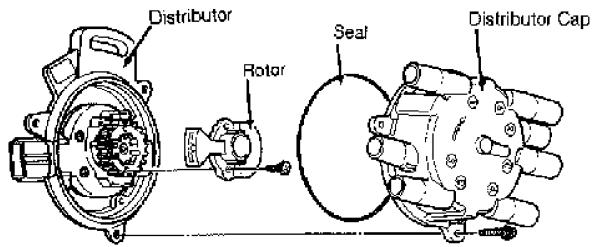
Exploded View of Distributor (929 DOHC) Courtesy of Mazda Motors Corp.
